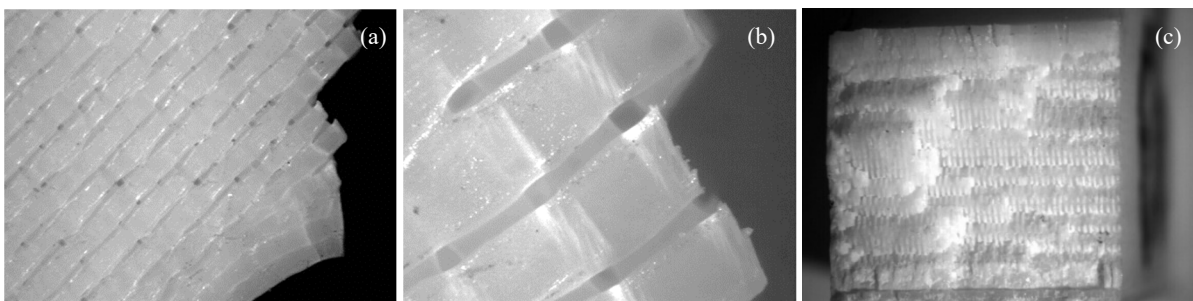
Observed defects: (a) inaccuracy on temperature of deposition; 12×; (b) detail of the fracture, 50×; (c) fracture surface, 6×.
